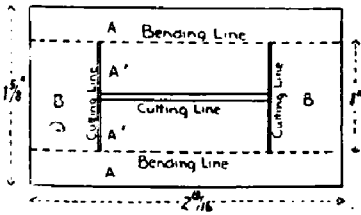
PLAN OF 1-32 IN. BRASS PLATE TO BE CUT FOR STEAM WAYS.
